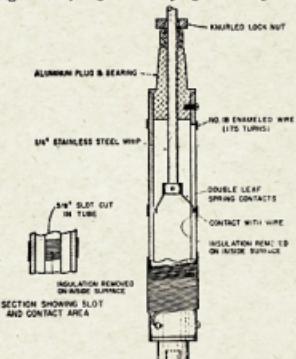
Cutaway drawing showing the constructional features of the loading coil. The dimensions can be varied to suit materials available.
